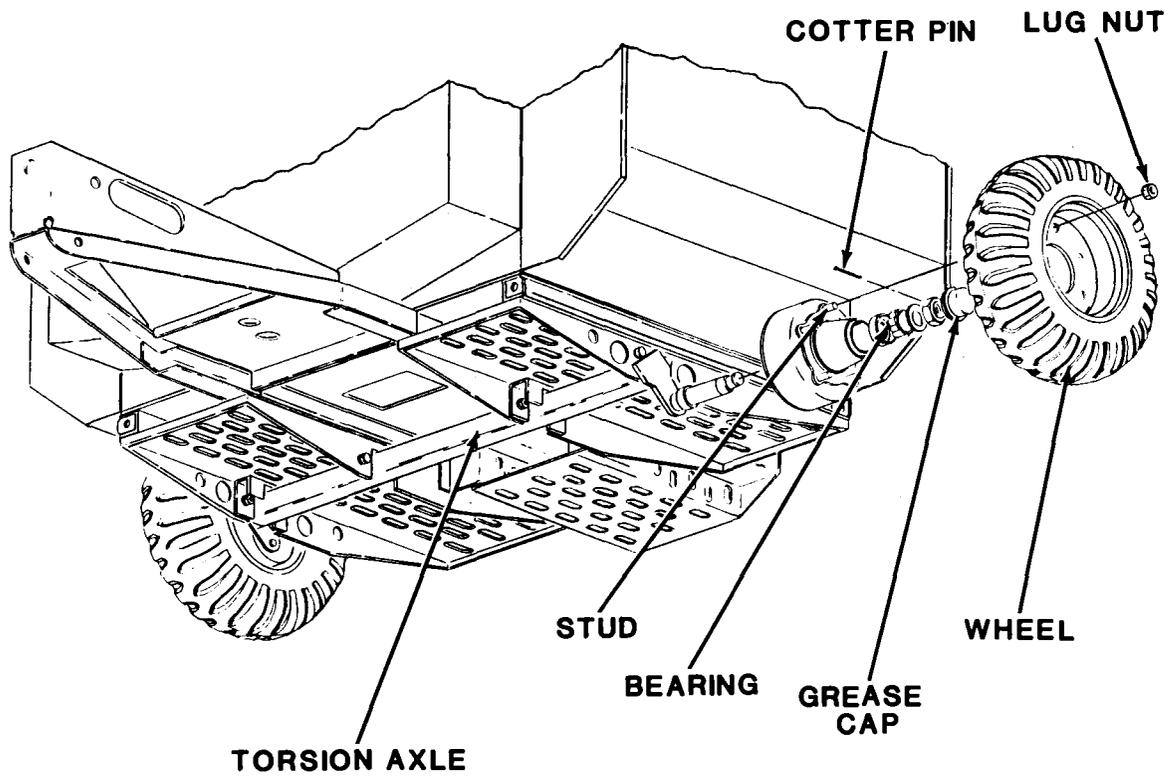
Torsion Axle Assembly and Wheel Assembly
